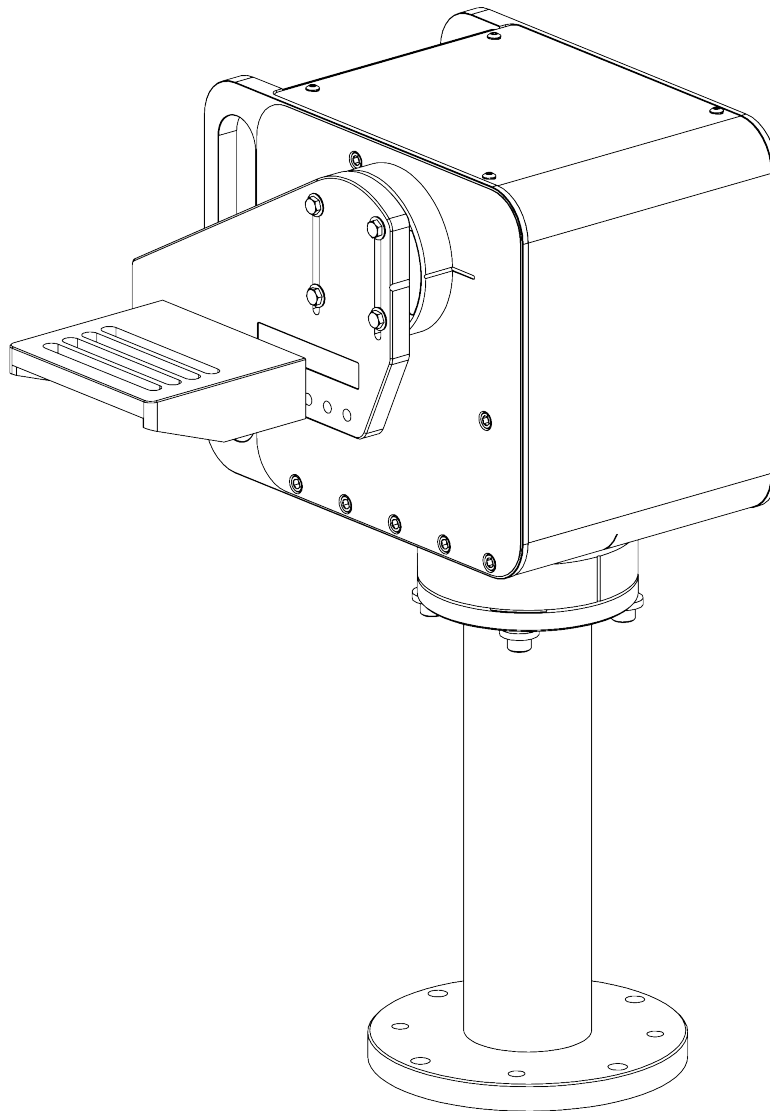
X300 Pan & Tilt Head, Mounted on a PM8 Pedestal Riser (front angled view)
